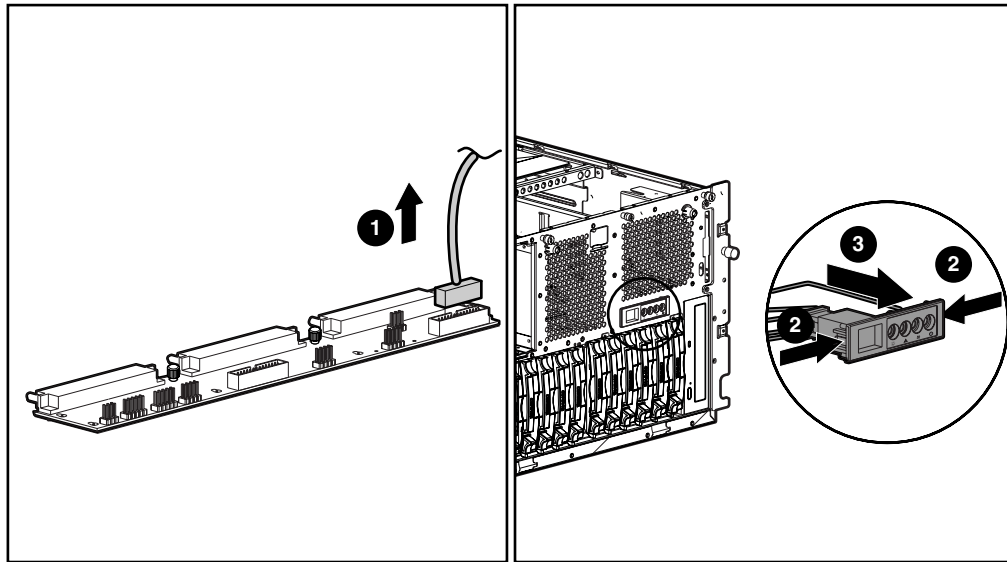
Removing the Power On/Standby switch and cable assembly
